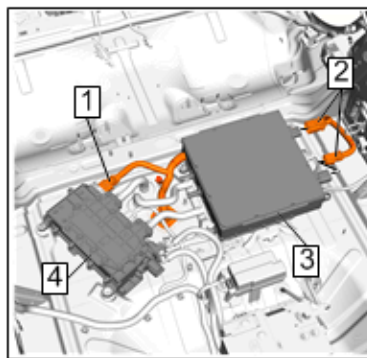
Accessory DC Power Control Module, Drive Motor Battery Charger And Electrical Connectors
